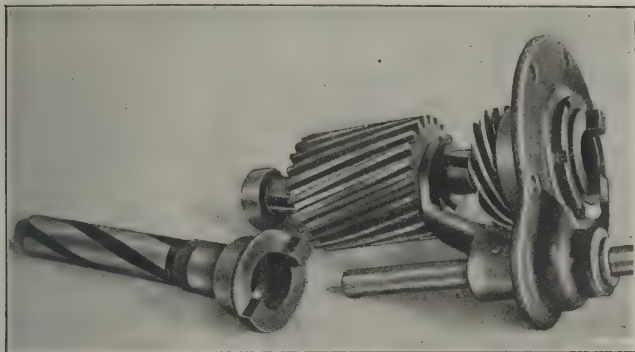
Spark-advance Shaft having Helical Grooves which are cut by Hobbing—Shaft assembled with Shifting Fork and Timer Gear
